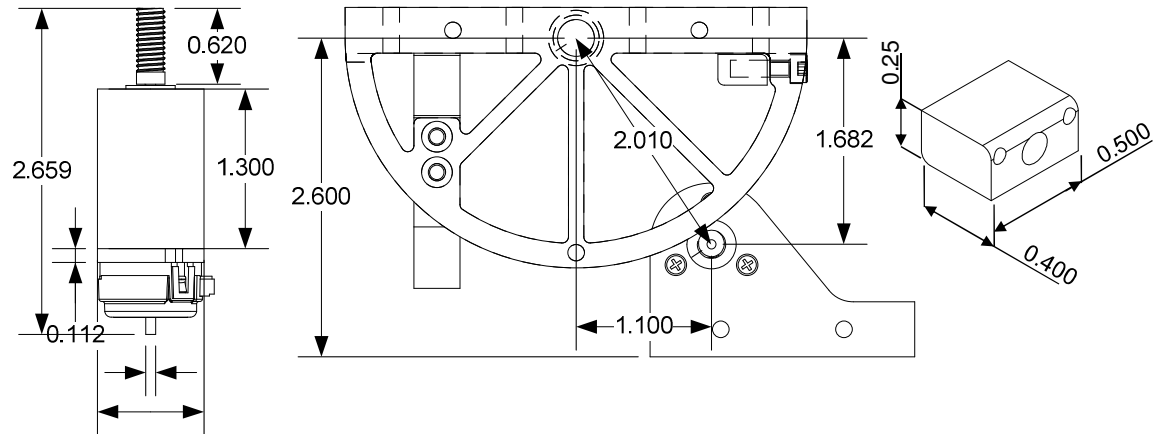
Capstan drive details, including Maxon 2322 motor, US Digital E4P encoder, and capstan drive pulley. The positioning of the X-stage capstan and capstan drive pulley with respect to each other and a detail of the cable tensioning block.
